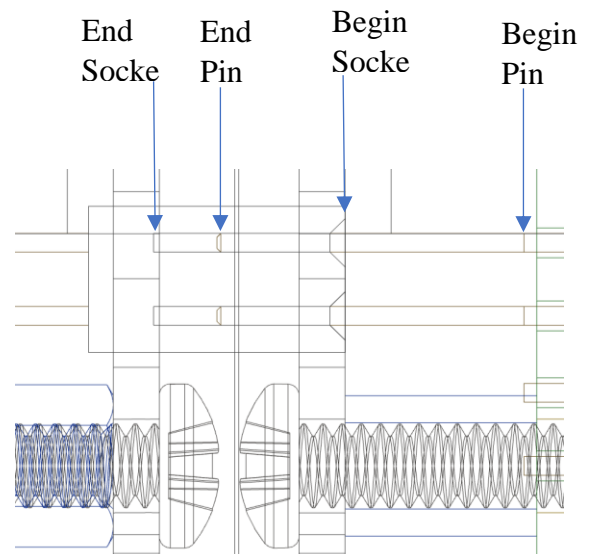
A Wire frame display of the Interface type 1, extending the PC/104 ISA pins into the next shell.
